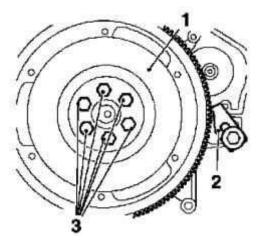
Install the flywheel: 1 - Handwheel, 2 - a special device, 3 - bolts fastening
